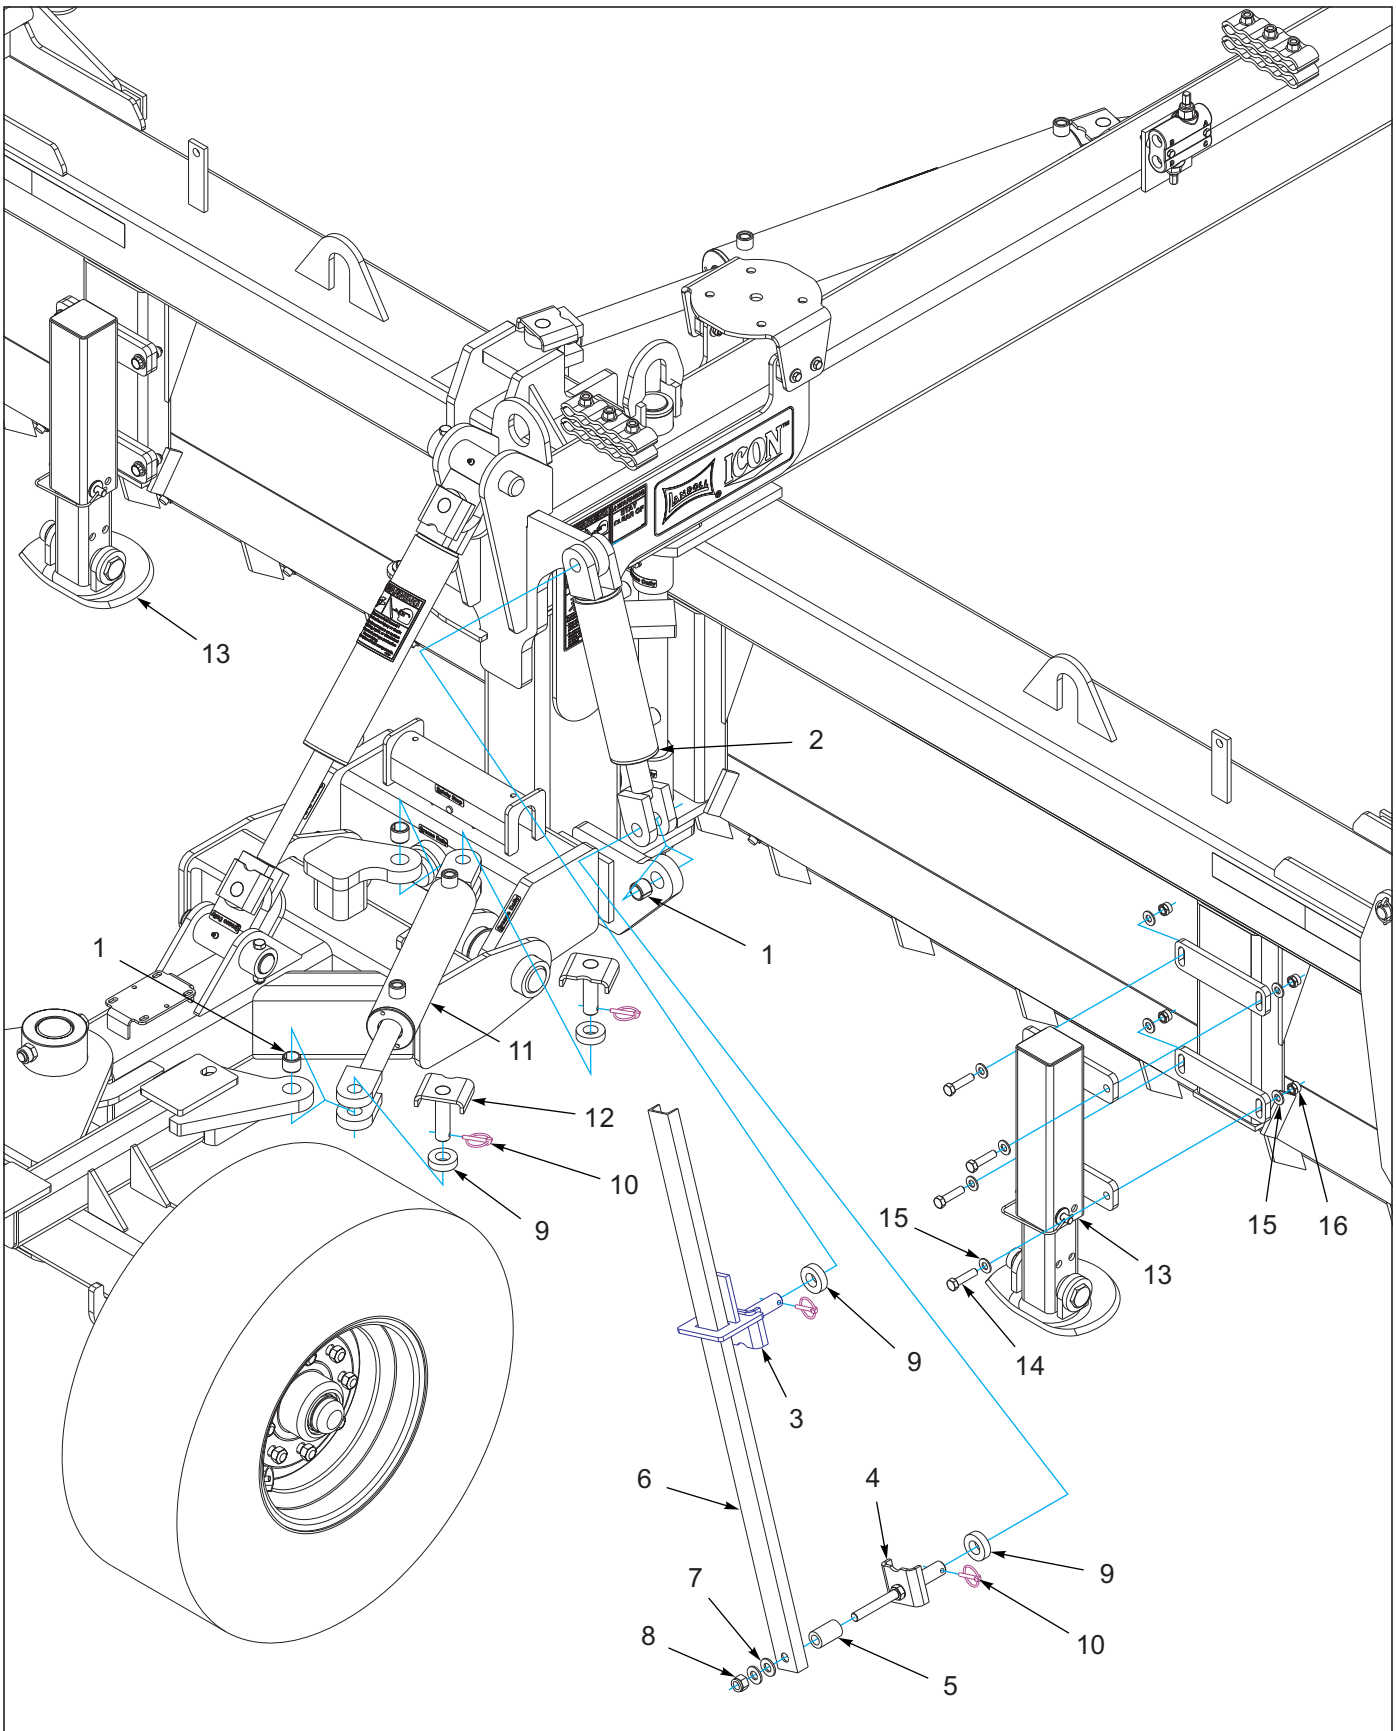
Grader Assembly Rear Cylinders and Skid
